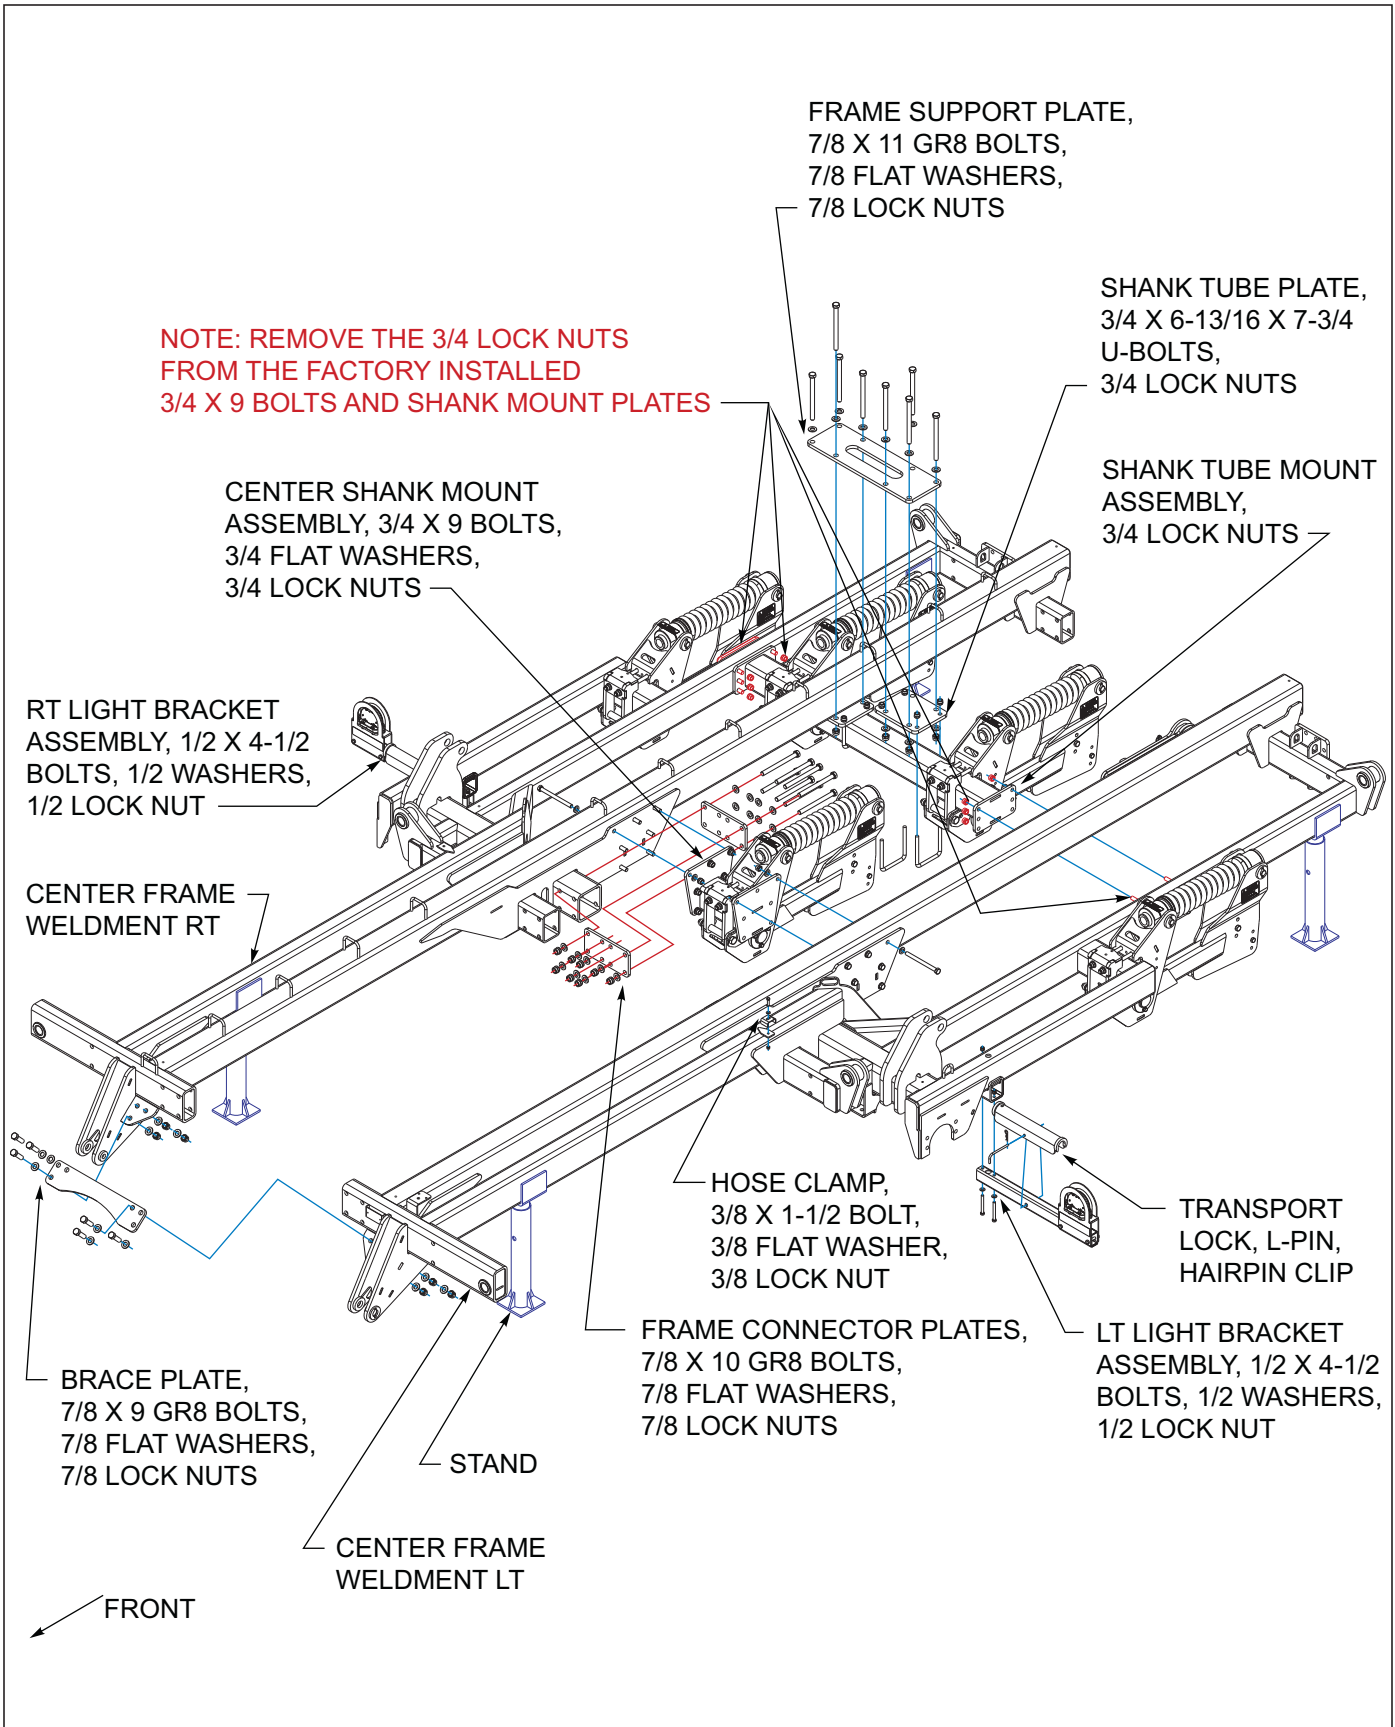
Center Frame Assembly 2411AFG-07-09 After 08/01/2022
